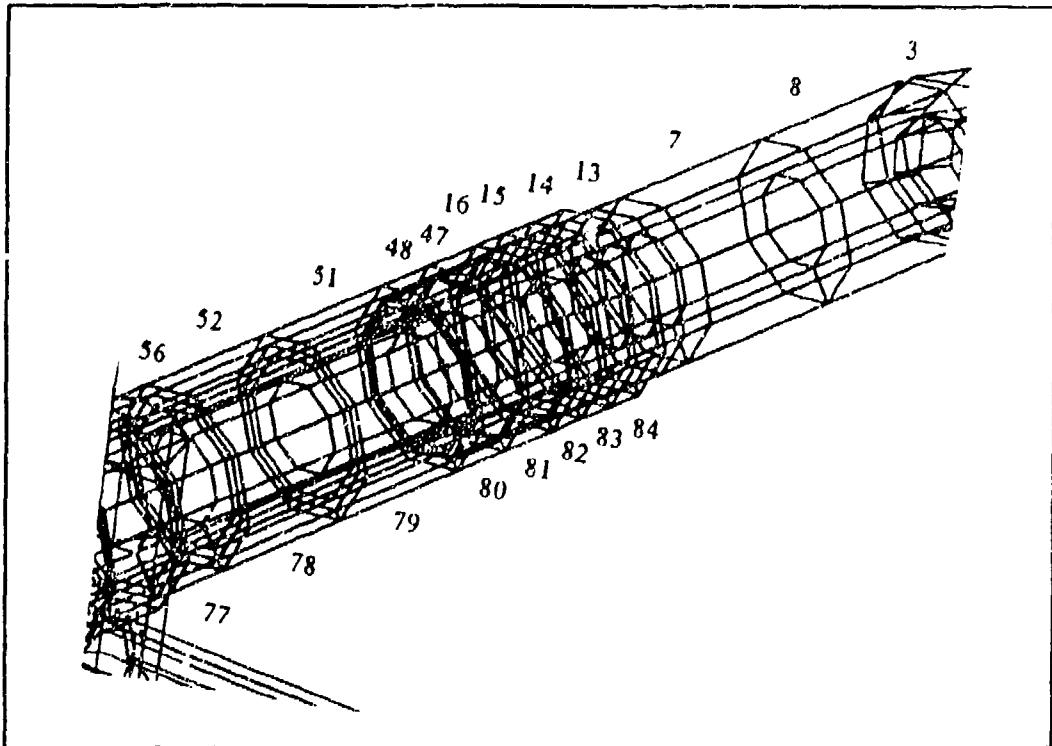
Attachment Point of Left Gear Leg and Aft Crosstube
